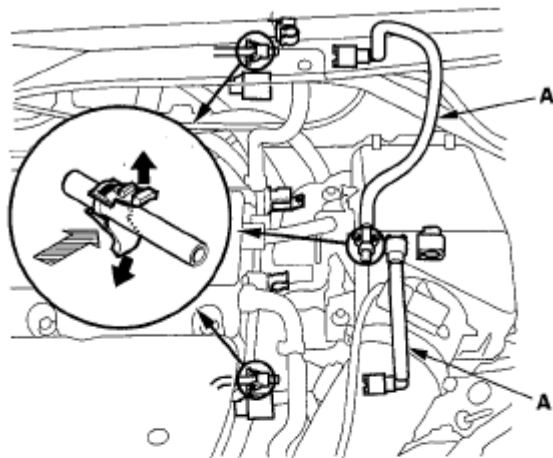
Connecting Fuel Line/Quick-Connect Fitting Assembly
